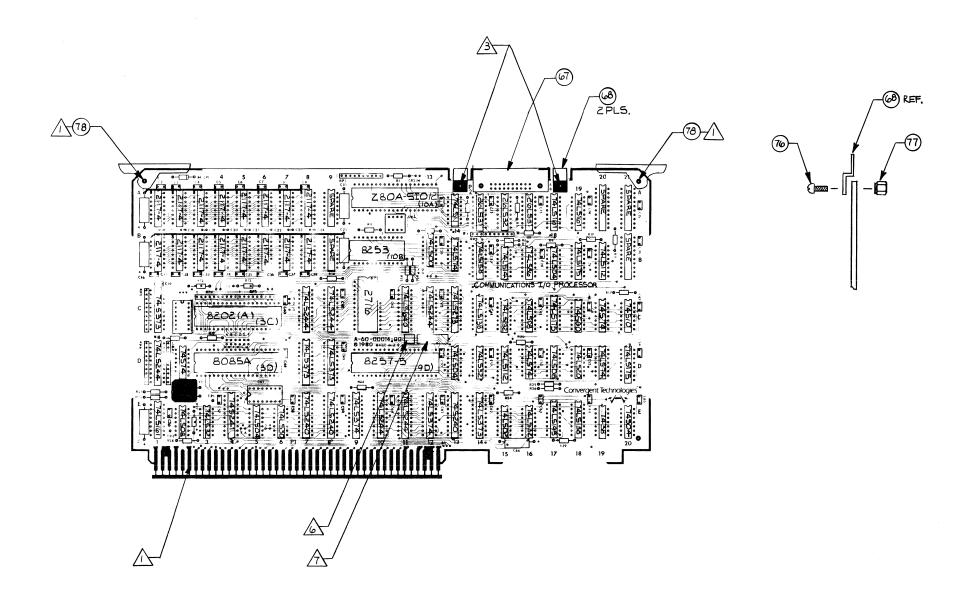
Communications I/O Processor Printed Circuit Assembly
